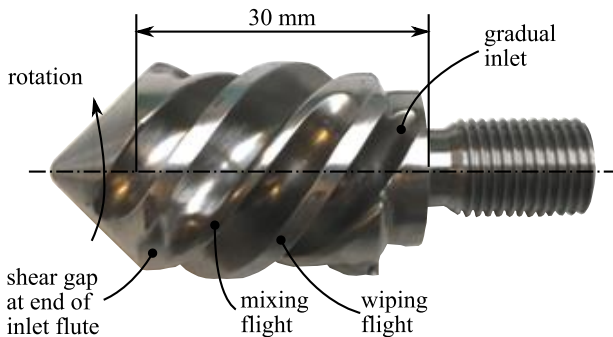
30 mm spiral mixing element for the thermoset injection molding process
